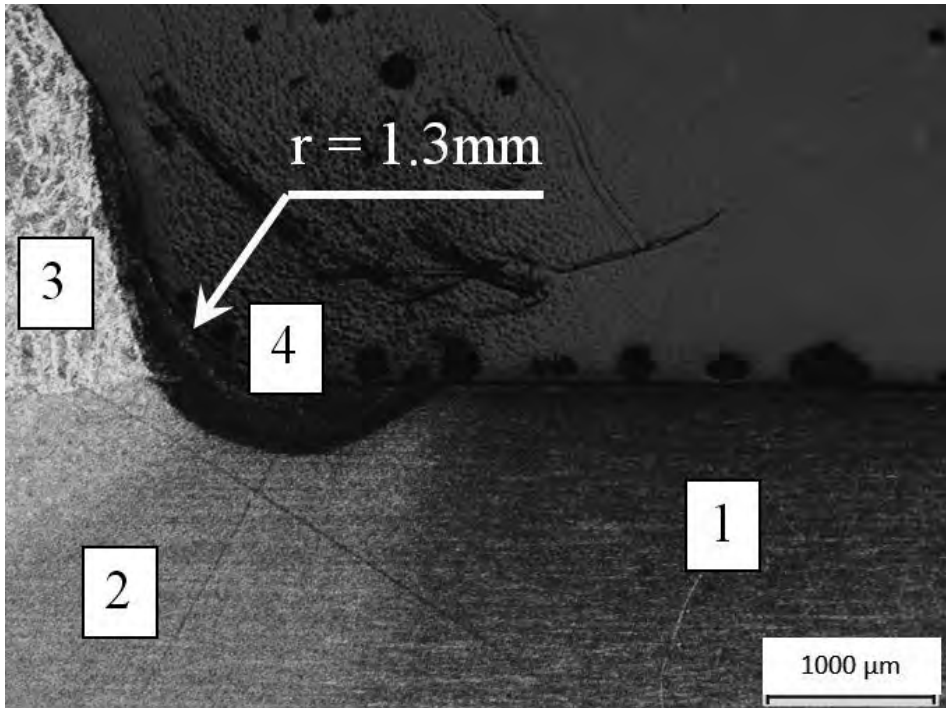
The weld toe radius after the remelting proces; cross-cut; etch. Nital 2 %.
